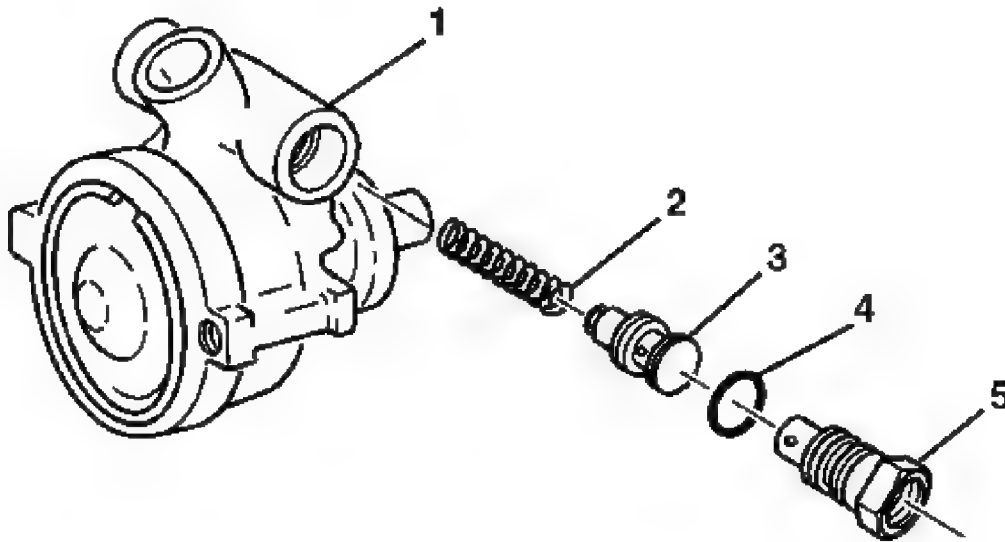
Exploded View Of Power Steering Pump Flow Control Valve (CB Series)
